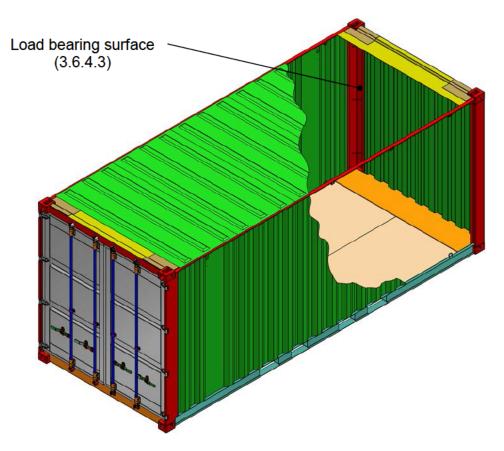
Load bearing surfaces in general cargo MILVAN
